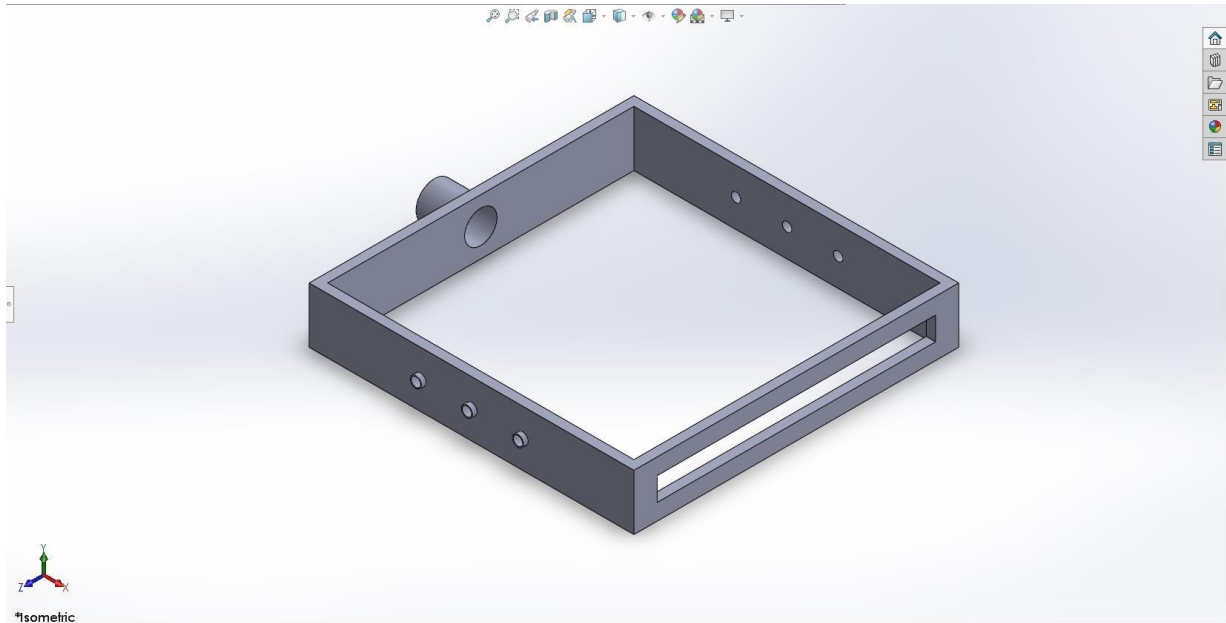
3D view of the side enclosure for the OLED vacuum chamber. The side enclosure for the OLED vacuum chamber has a length of 17.5 mm, a width of 17.5 mm, and a height of 3 mm. A groove of 0.6 mm is incorporated for enhanced stability. A front open section measuring 15 mm in length and 1.5mm in width is included to facilitate the insertion of the OLED device.
